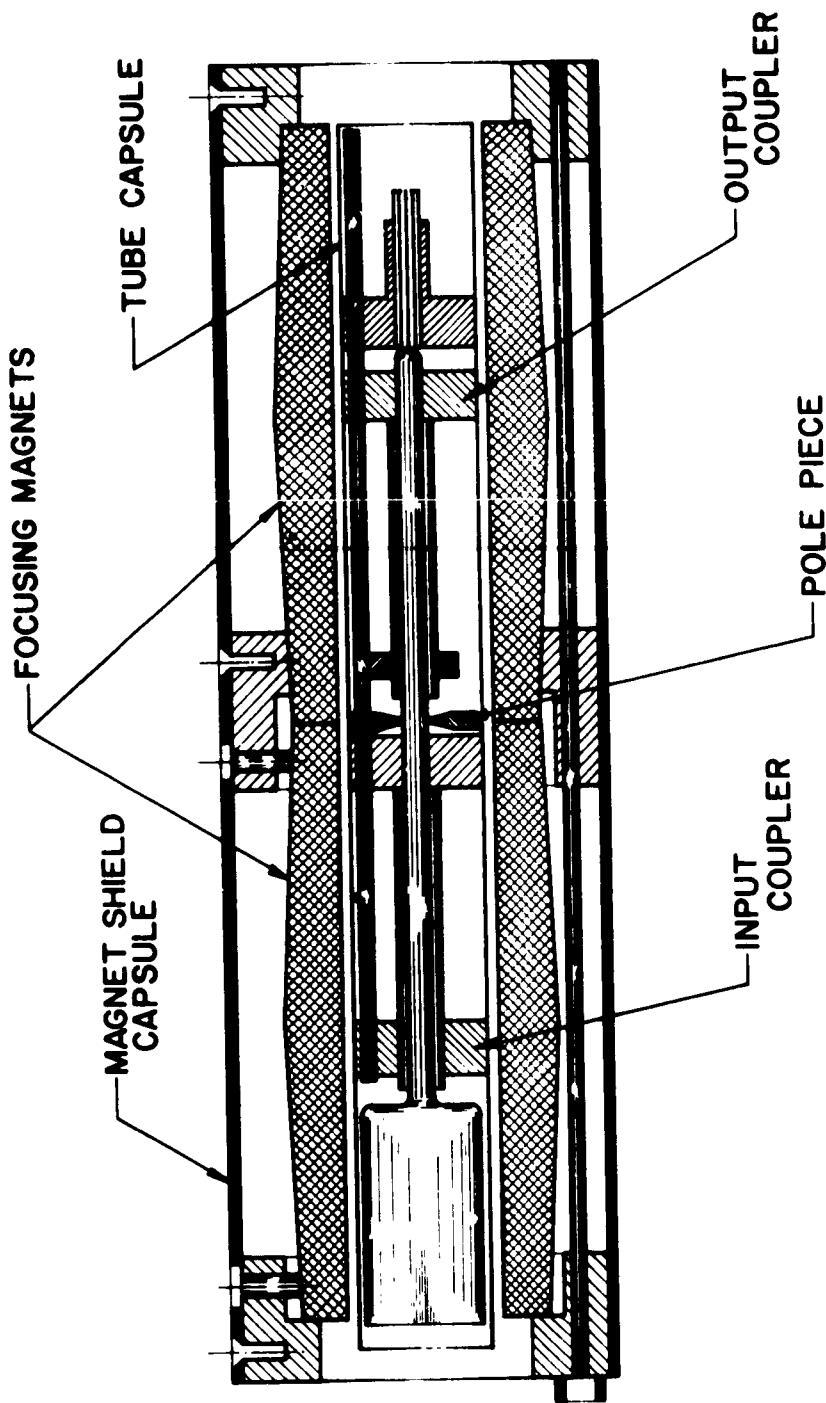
This sketch illustrates the method of supporting the two Alnico magnets to produce a single reversal. One magnet is held fixed with respect to the shield capsule, while the other is positionable with adjusting screws.
